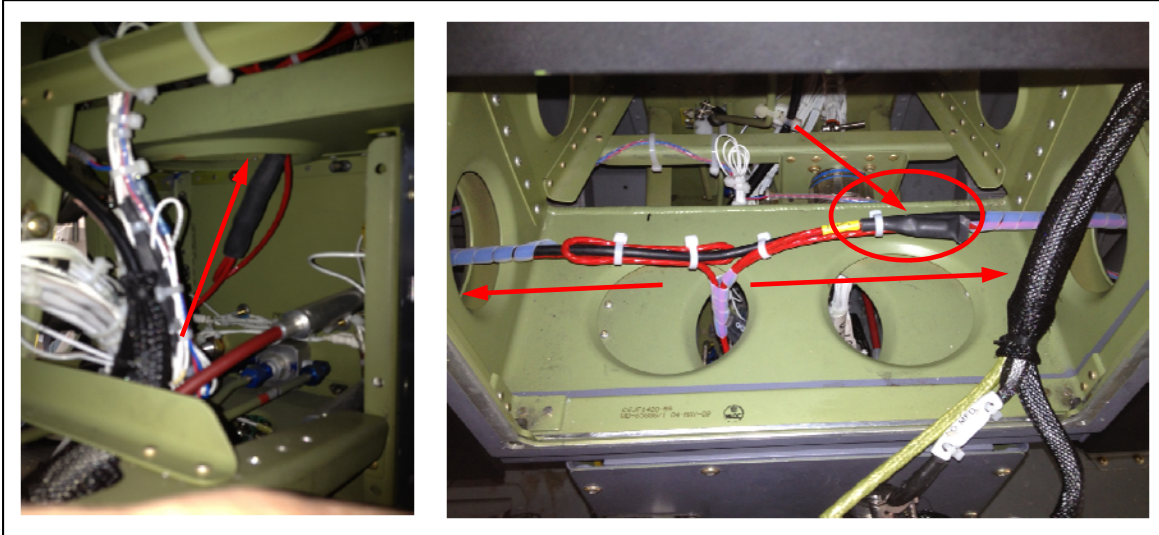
Example of instrument thermal cable assembly shown routed from panel center section up (left), then outboard to elements left and right. Thermal control shown secured 6 - 18 in / 15 - 45 cm from elements in the center section of panel with existing wiring and cable ties (right), or secure with supplied cable anchor TU02782.
